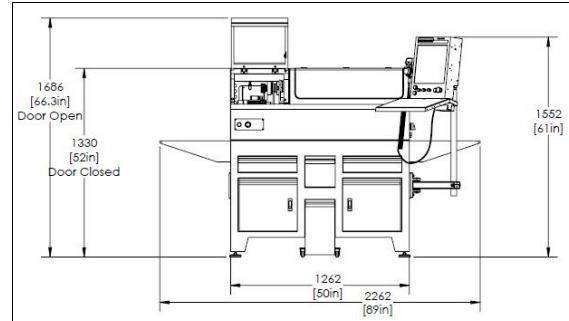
Dimensions of the machine itself, as viewed from the front.
